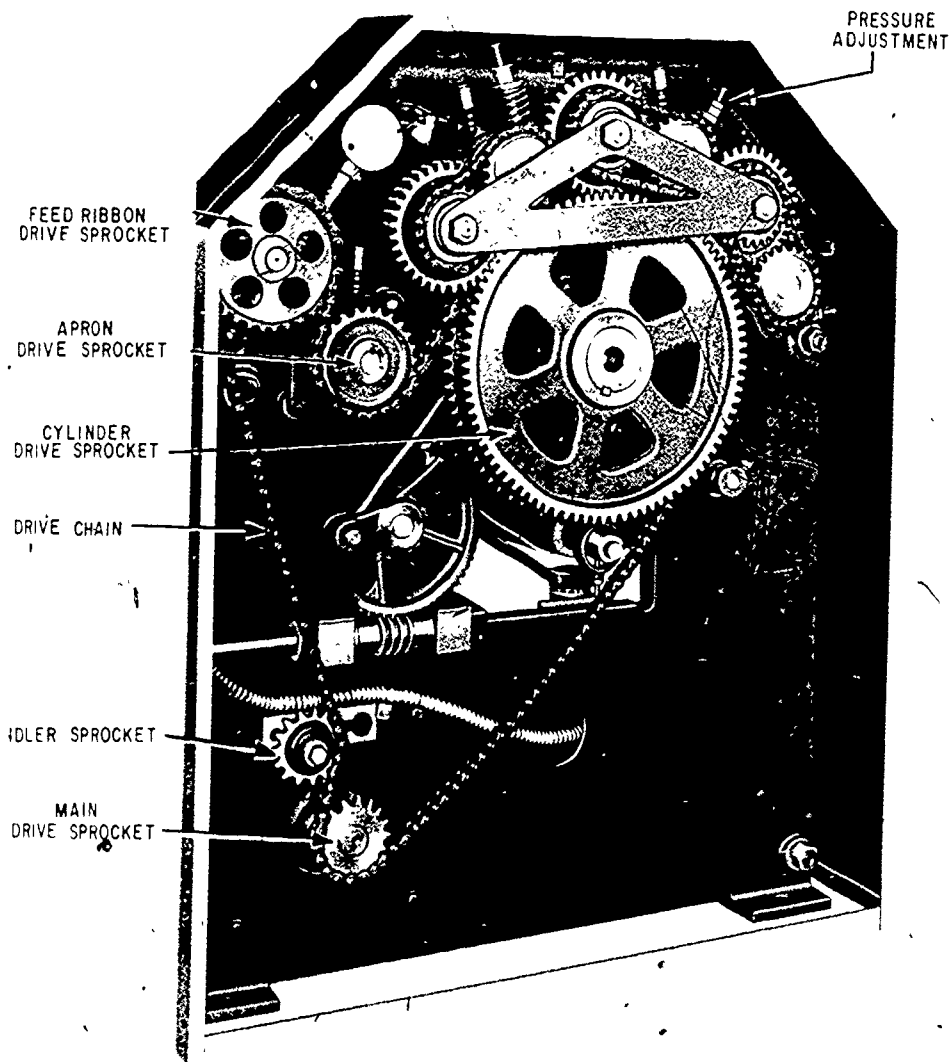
Pressure roll adjustments and gears in right-hand frame.
